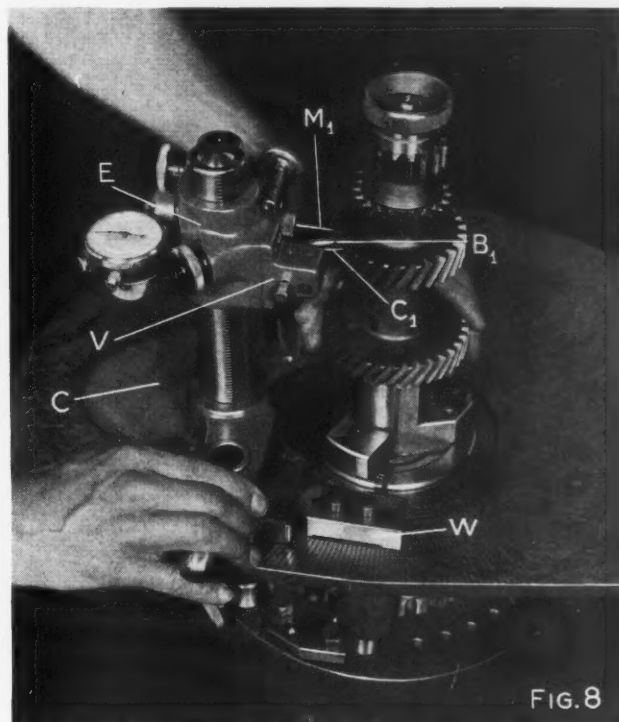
Set-up Employed for Checking the Circular Pitch of Gears
